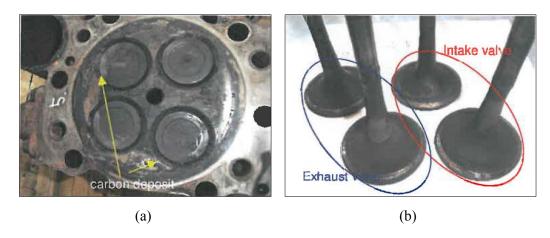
Cylinder head surface, intake and exhaust valves. Picture (a) shows the cylinder head surface of cylinder #5. Picture (b) shows the intake and exhaust valves of cylinder #5. Courtesy of [25]
